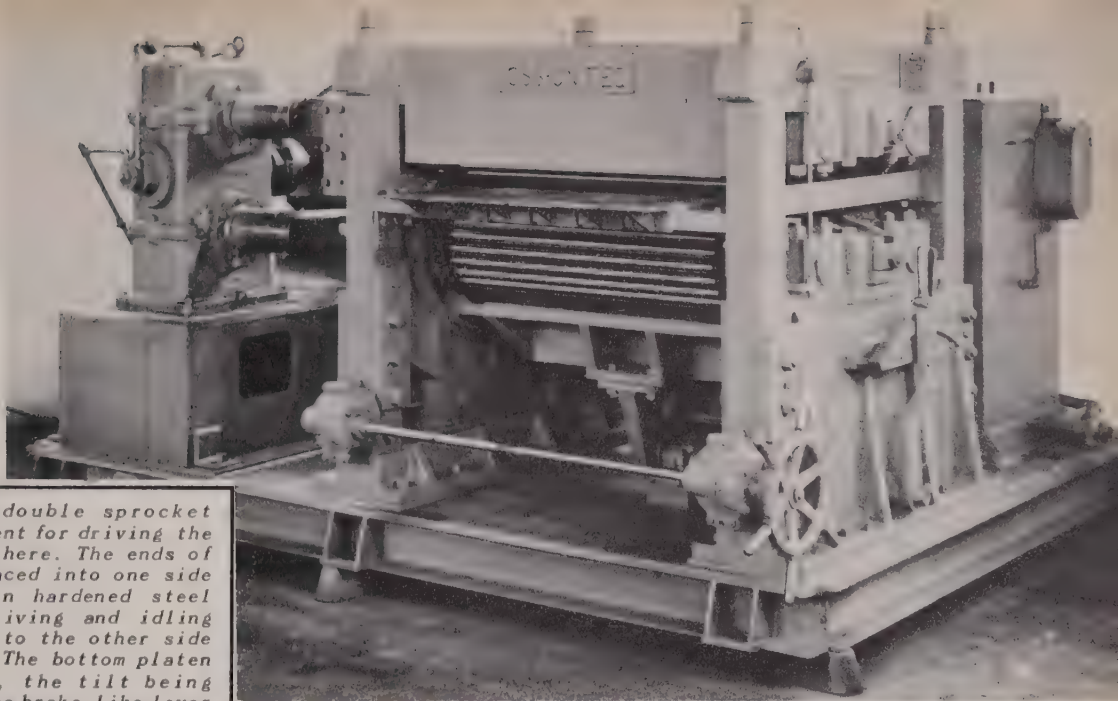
The double sprocket chain arrangement for driving the rolls is shown here. The ends of the rolls are laced into one side of each chain on hardened steel pins and the driving and idling sprockets fit into the other side of each chain. The bottom platen can be tilted, the tilt being controlled by the brake-like lever to the right of the machine.
